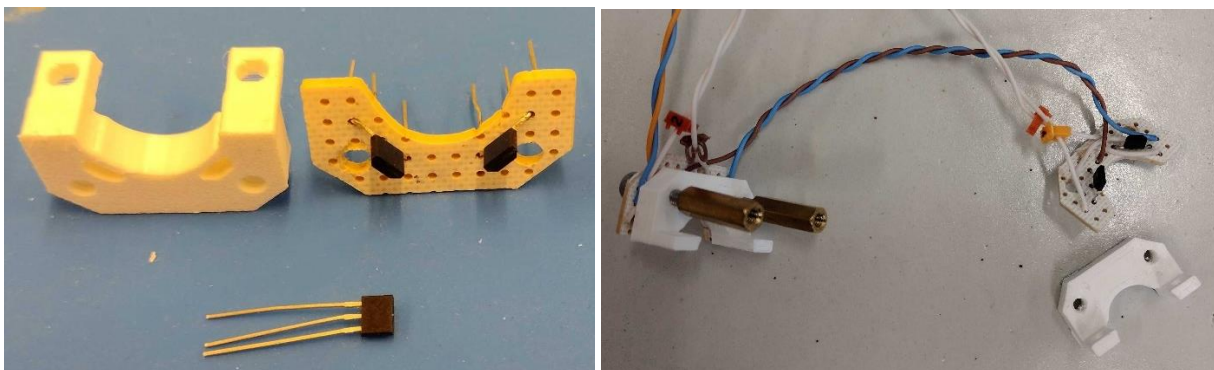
Left: 3D-printed Hall-effect sensor holder and the prototype PCB during assembly of the magnetic phase-boundary tracking system. Right: Final steps of the magnetic phase-boundary tracking system assembly.
